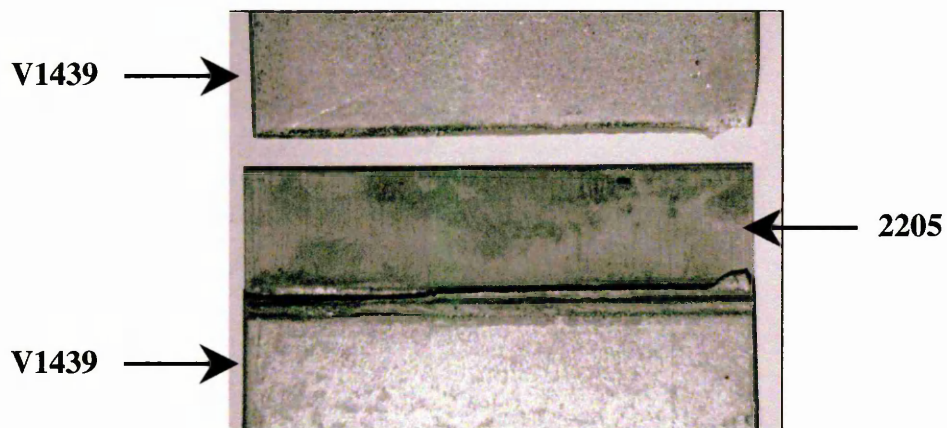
Shows a fatigue specimen in which fatigue failure occurred in the V1439
